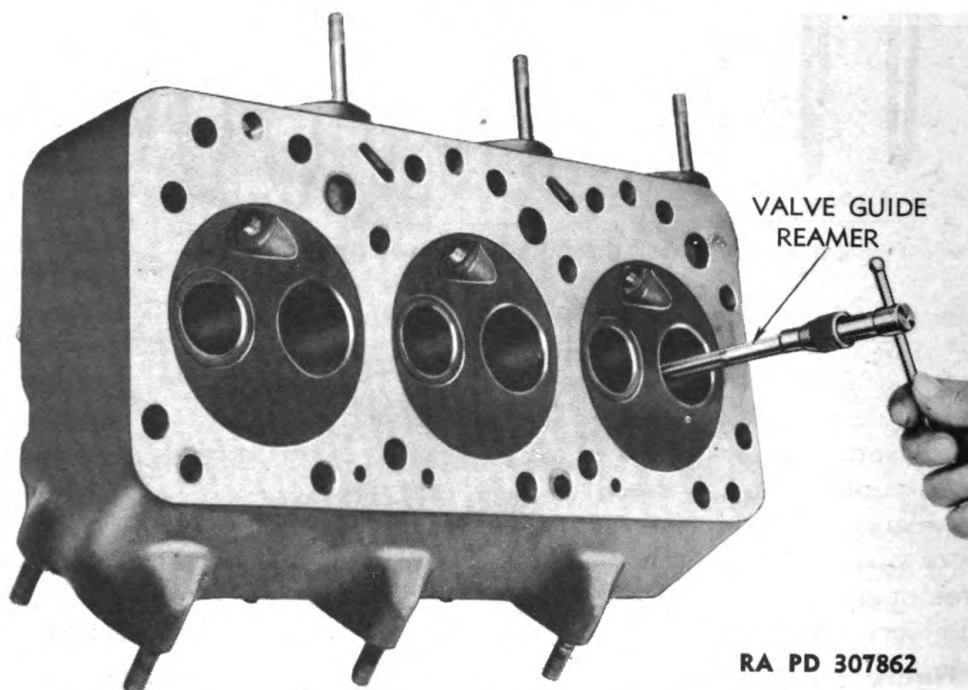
Reaming Valve Guide, Using Reamer 40-R-2310
